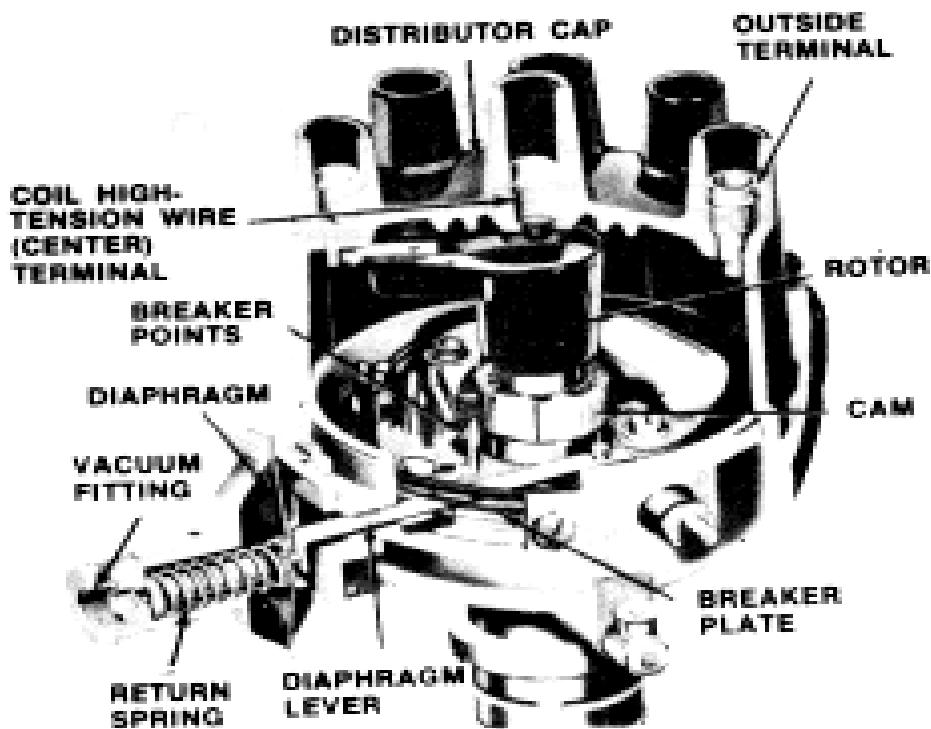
Cutaway View Of distributor, Showing How The Rotor Is Mounted On Top Of The Cam.. This Picture Also Shows The Construction Of The Vacuum Advance Mechanism.
